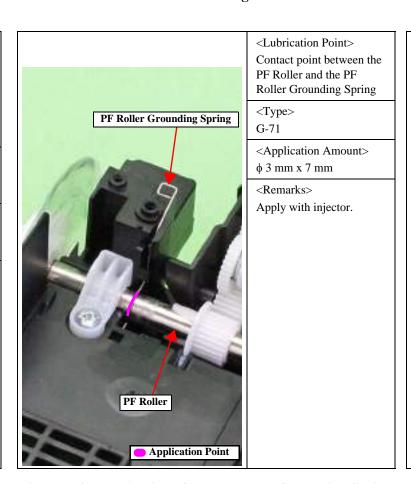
Lubrication of the PF Roller Grounding Spring
